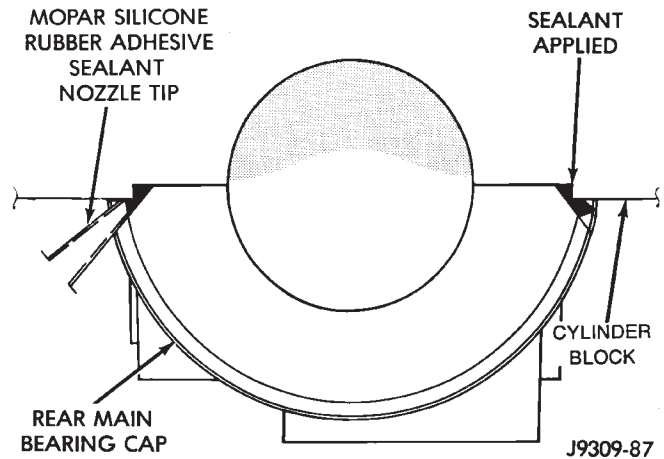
Apply Sealant to Bearing Cap to Block Joint OIL PUMP
